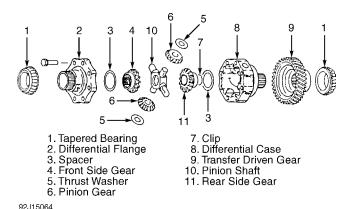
Center Differential Assembly (W4A32 & W4A33) Courtesy of Mitsubishi Motor Sales of America.
